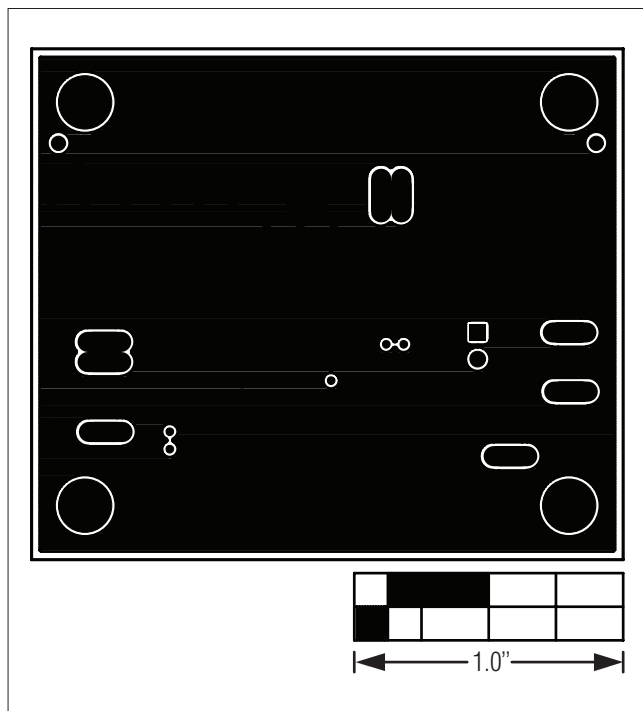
MAX15050 EV Kit PCB Layout—Inner Layer 3
